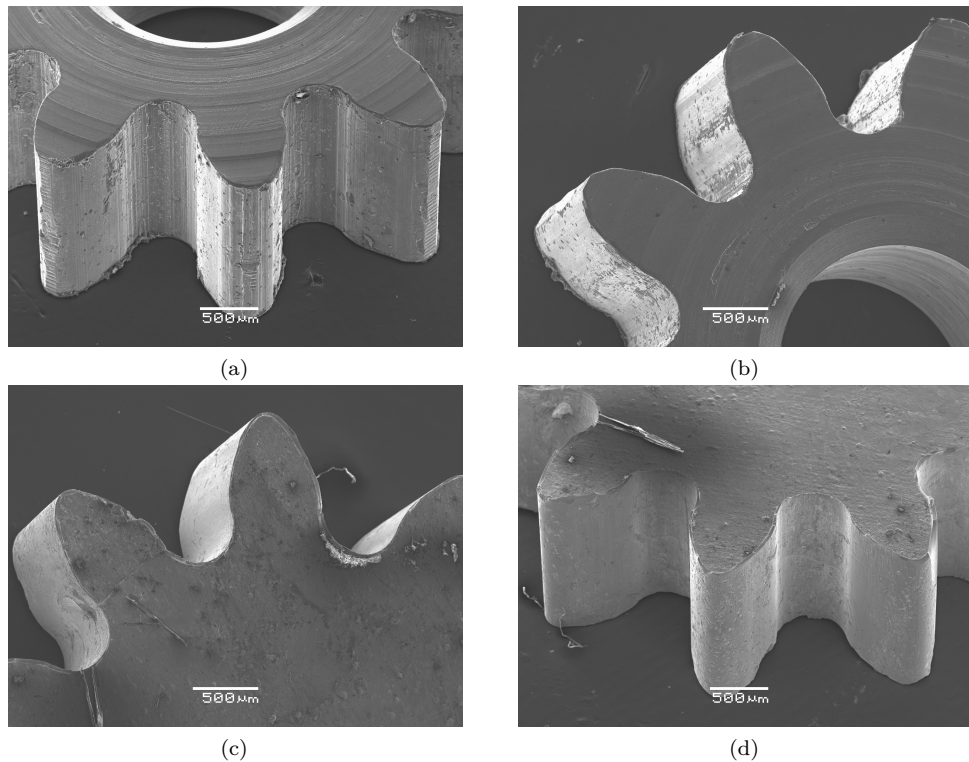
Figure (a) and (b) is a machined gear wheel from the extruded aluminium profile. Figures (c) and (d) show the gear wheel obtained through forming of the $Mg_{60}Cu_{30}Y_{10}$ low temperature BMG.
